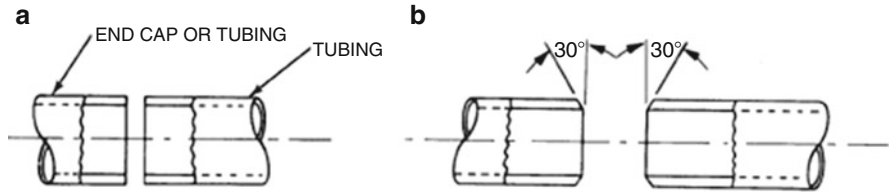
Square butt joint designs [1]. (a) Standard design and (b) single bevel design
